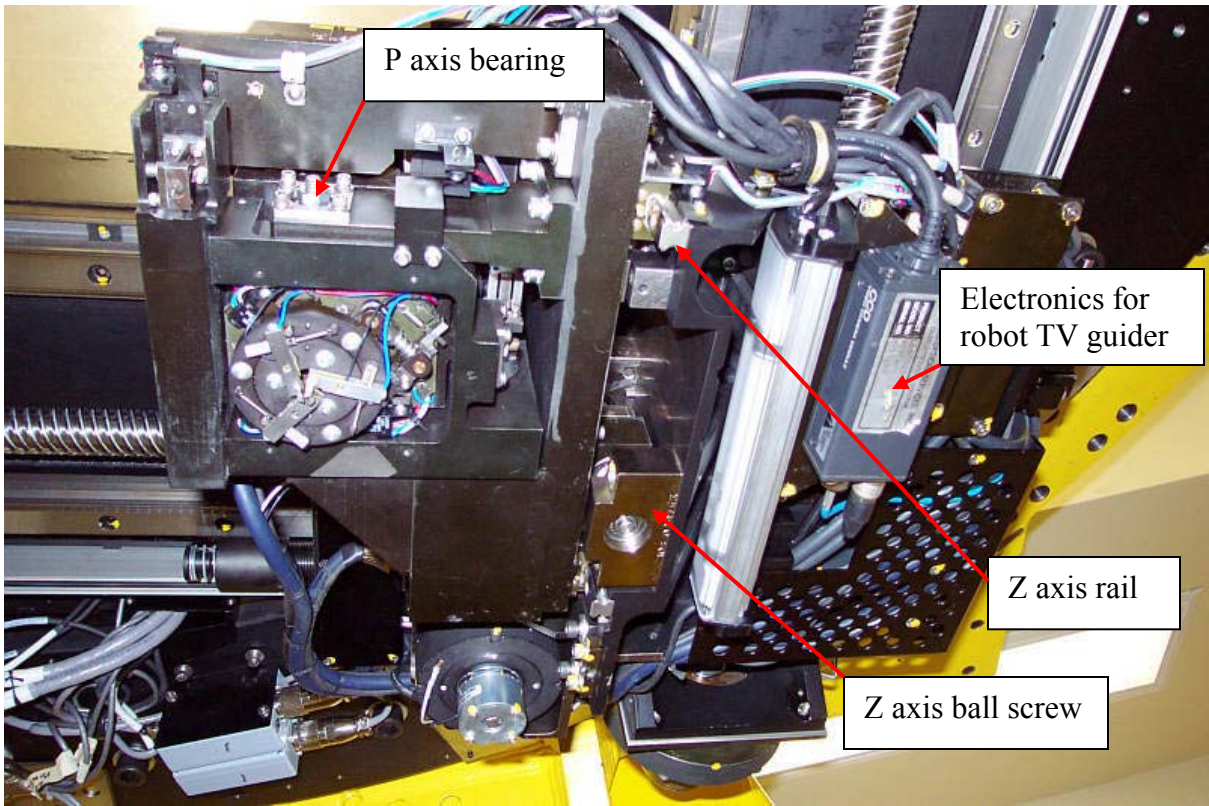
Gimbal and Z axis assembly viewed from below with the focal surface assembly removed.
